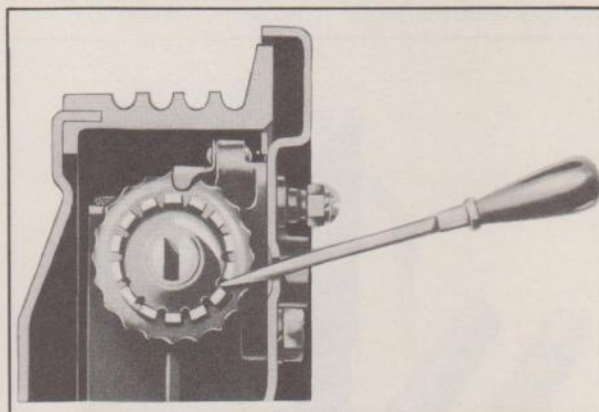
Adjusting Brakes Through Slot in Flange Plate
